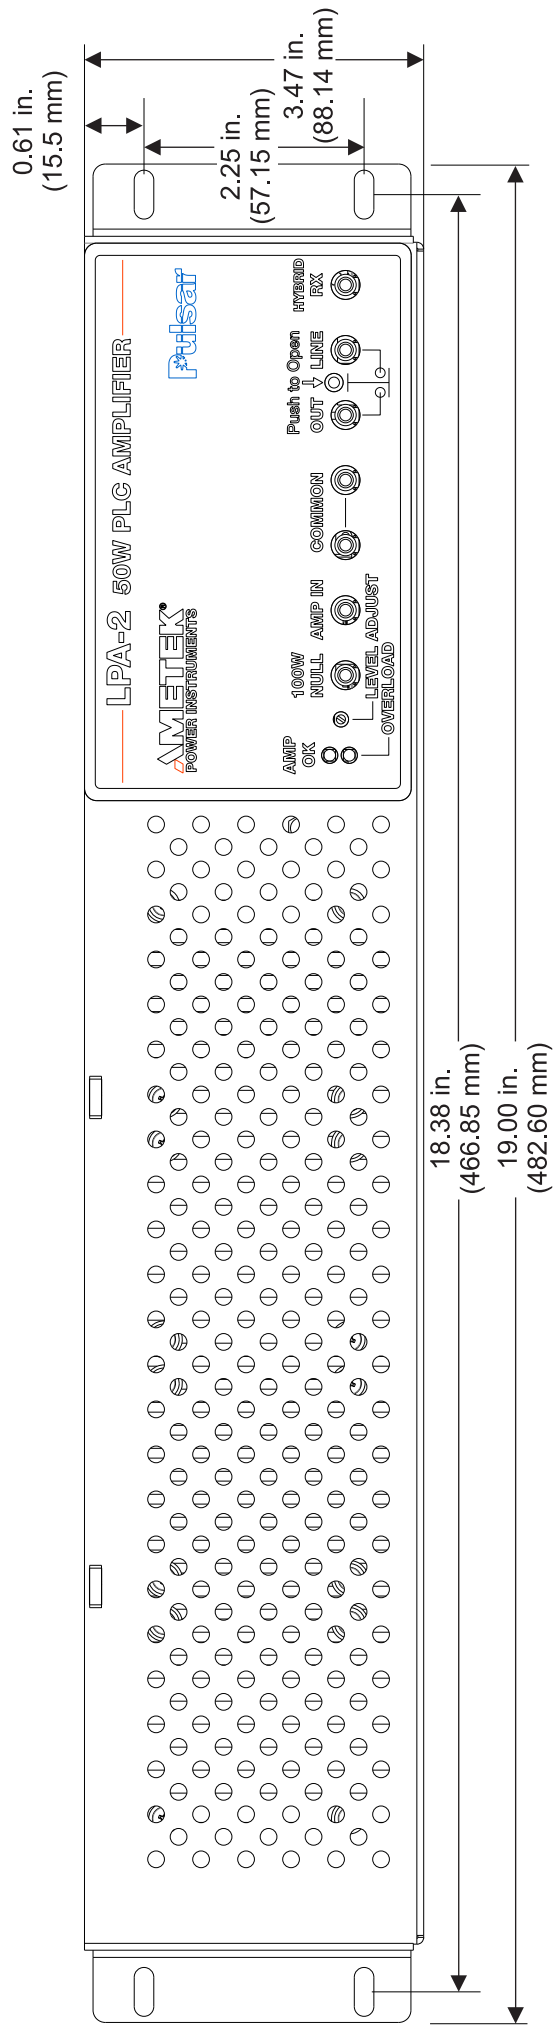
Optional Projection Mounting Position (Reversed Mounting Ears).
